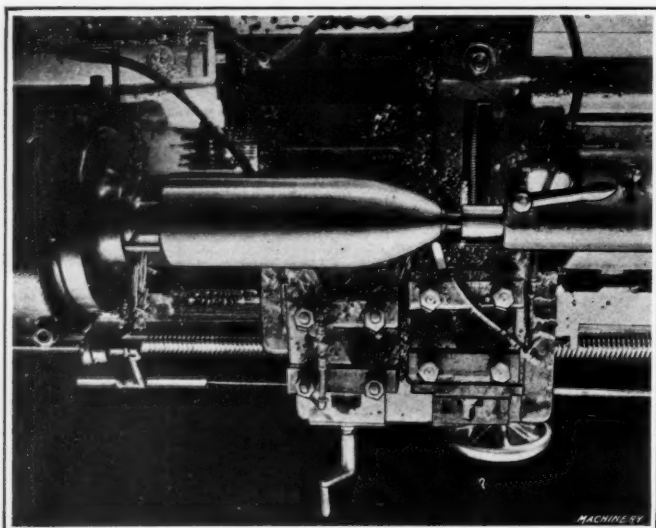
Close View of Tools used for performing Rough-turning Operation
